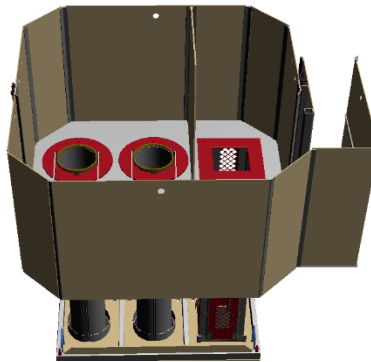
Sleeve loading station (at INTEC or within the new DTS at ATR).
